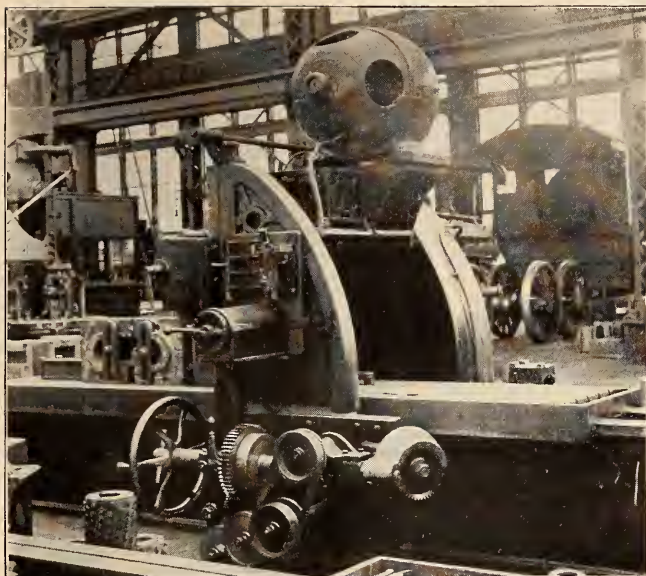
NEWTON PLANE MILLING MACHINE DIRECT CONNECTED TO A 20 H. P. MULTIPLE VOLTAGE CROCKER-WHEELER MOTOR.
